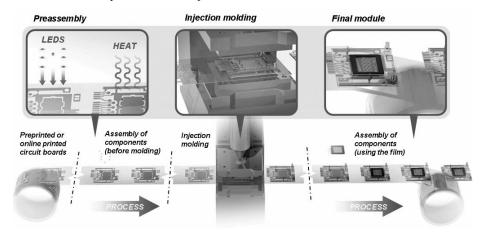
Stop and go roll-to-sheet production for Printed Hybrid Systems.
